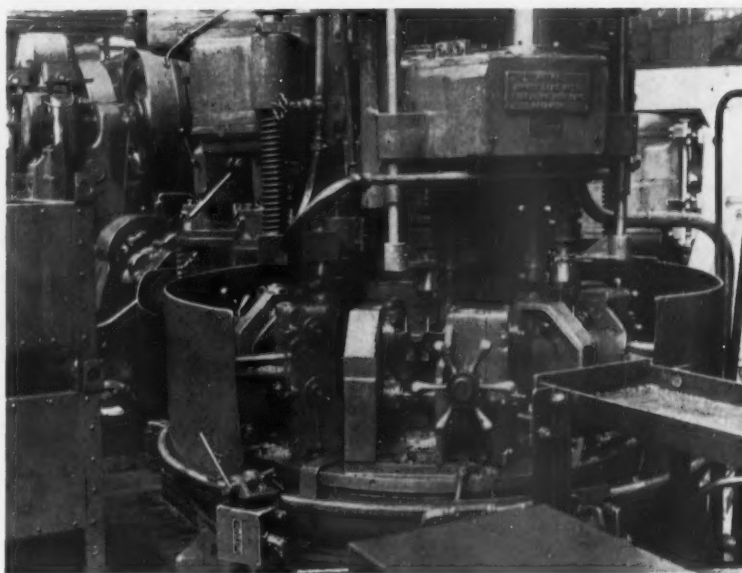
Machining joint faces and studs on Ford connecting rods for Anglia and Prefect engine
